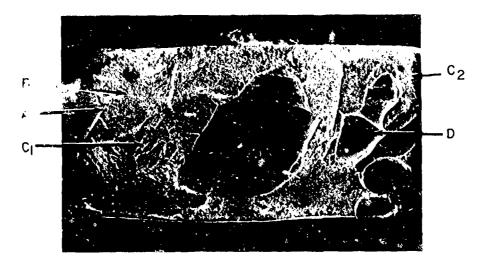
Fatigue fracture surface of an A-514 weldment containing porosity, 8x.
